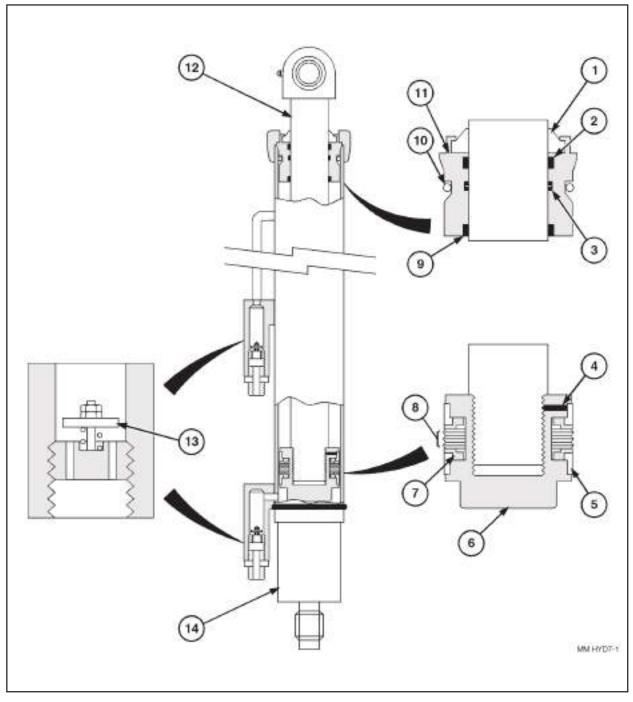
TYPICAL CYLINDER SECTIONAL VIEW
